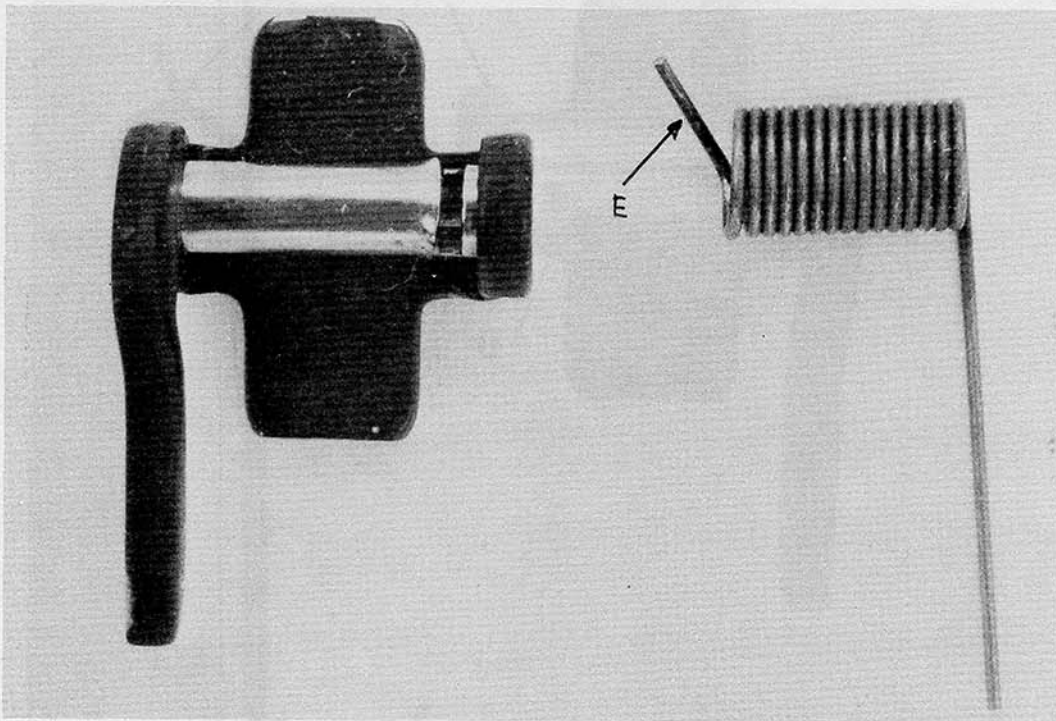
Colt M16A1 rifle SN 6418244 automatic sear assembly partially disassembled.
